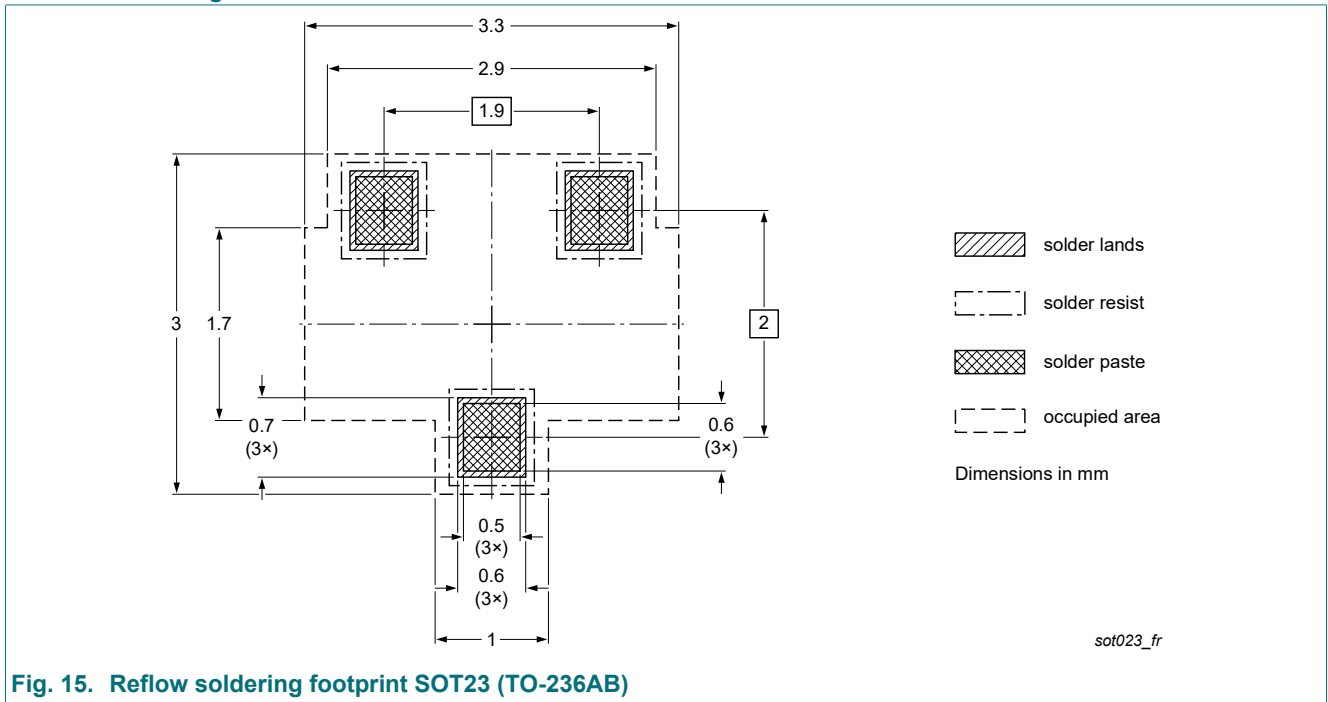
Reflow soldering footprint SOT23 (TO-236AB)
